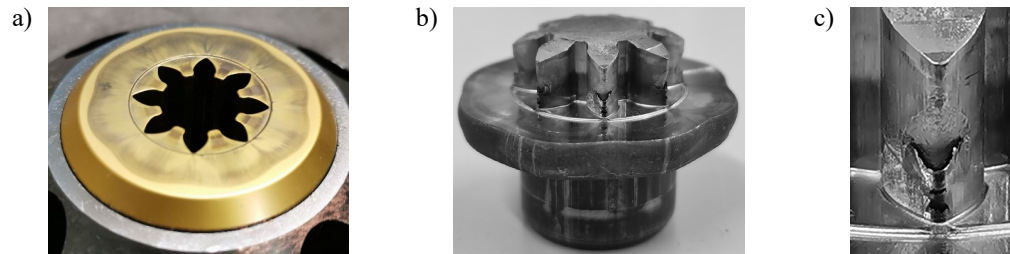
a) Trimming die with annular indentation of 0.25 mm, b) pressed part with cracks and c) detail of tooth tip.
